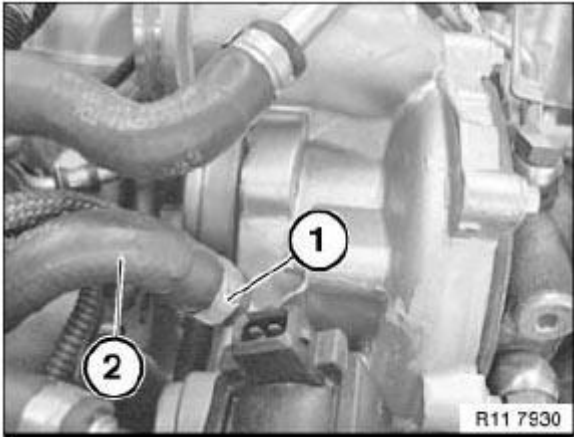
Identifying Coolant Feed Line And Hose Clip
